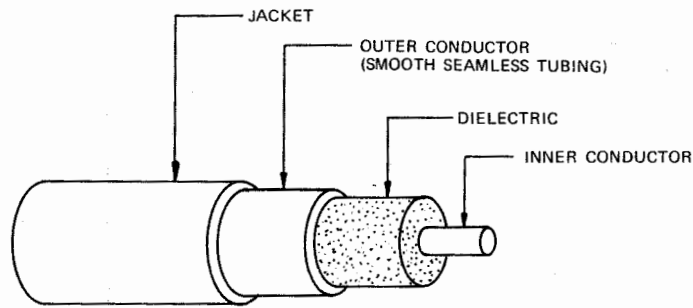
Typical Semi-rigid Foam Dielectric Coaxial Cable Construction
